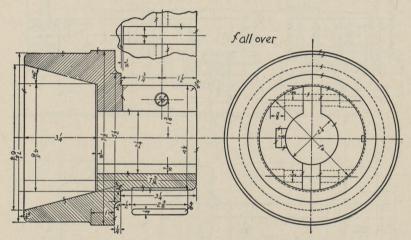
An incorrect drawing to be checked for errors (driven cone).
